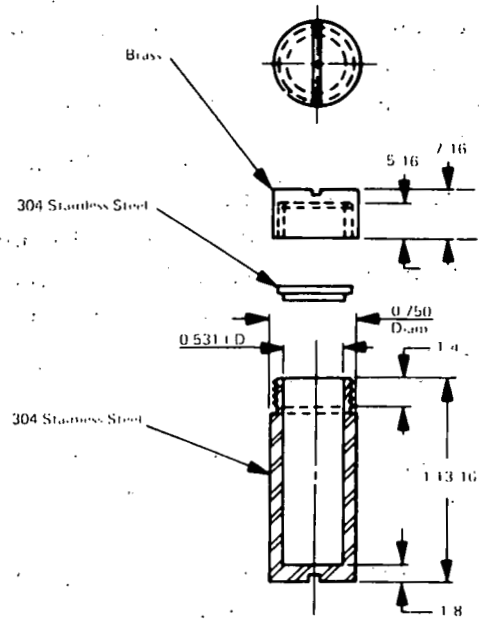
Plutonium inner capsule (dimensions in in.).
